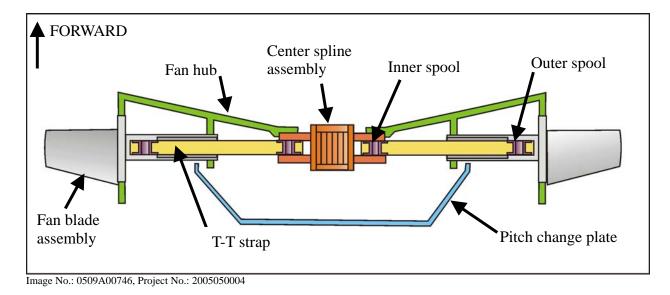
Schematic of the anti-torque fan assembly cross-section.
